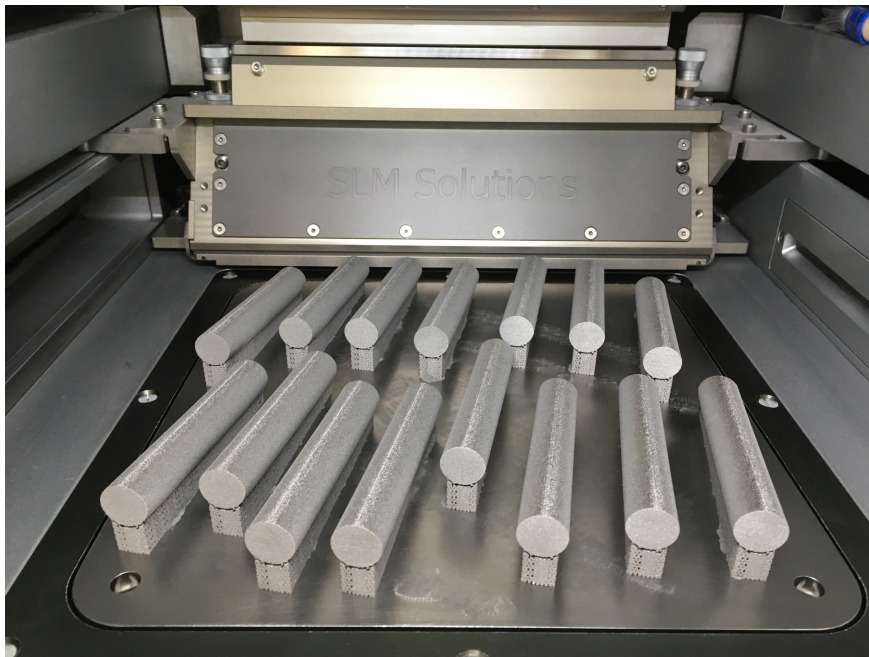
Ti-6AL-4V fatigue sample in the SLM 280HL machine.
